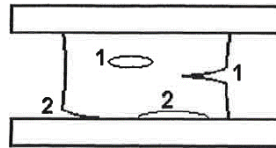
(1) cohesion failure, (2) adhesion failure [87]
